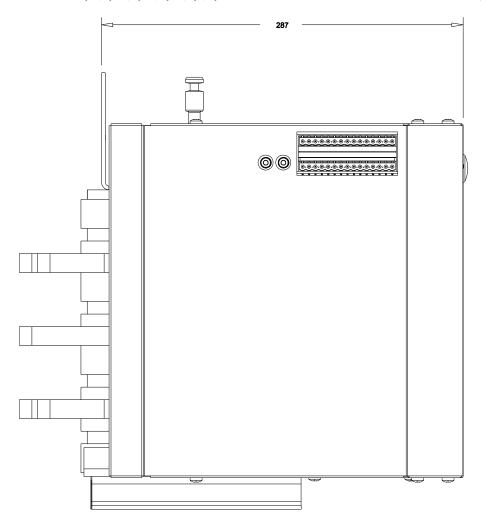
Device dimensions from left side. All dimensions in millimeters.
